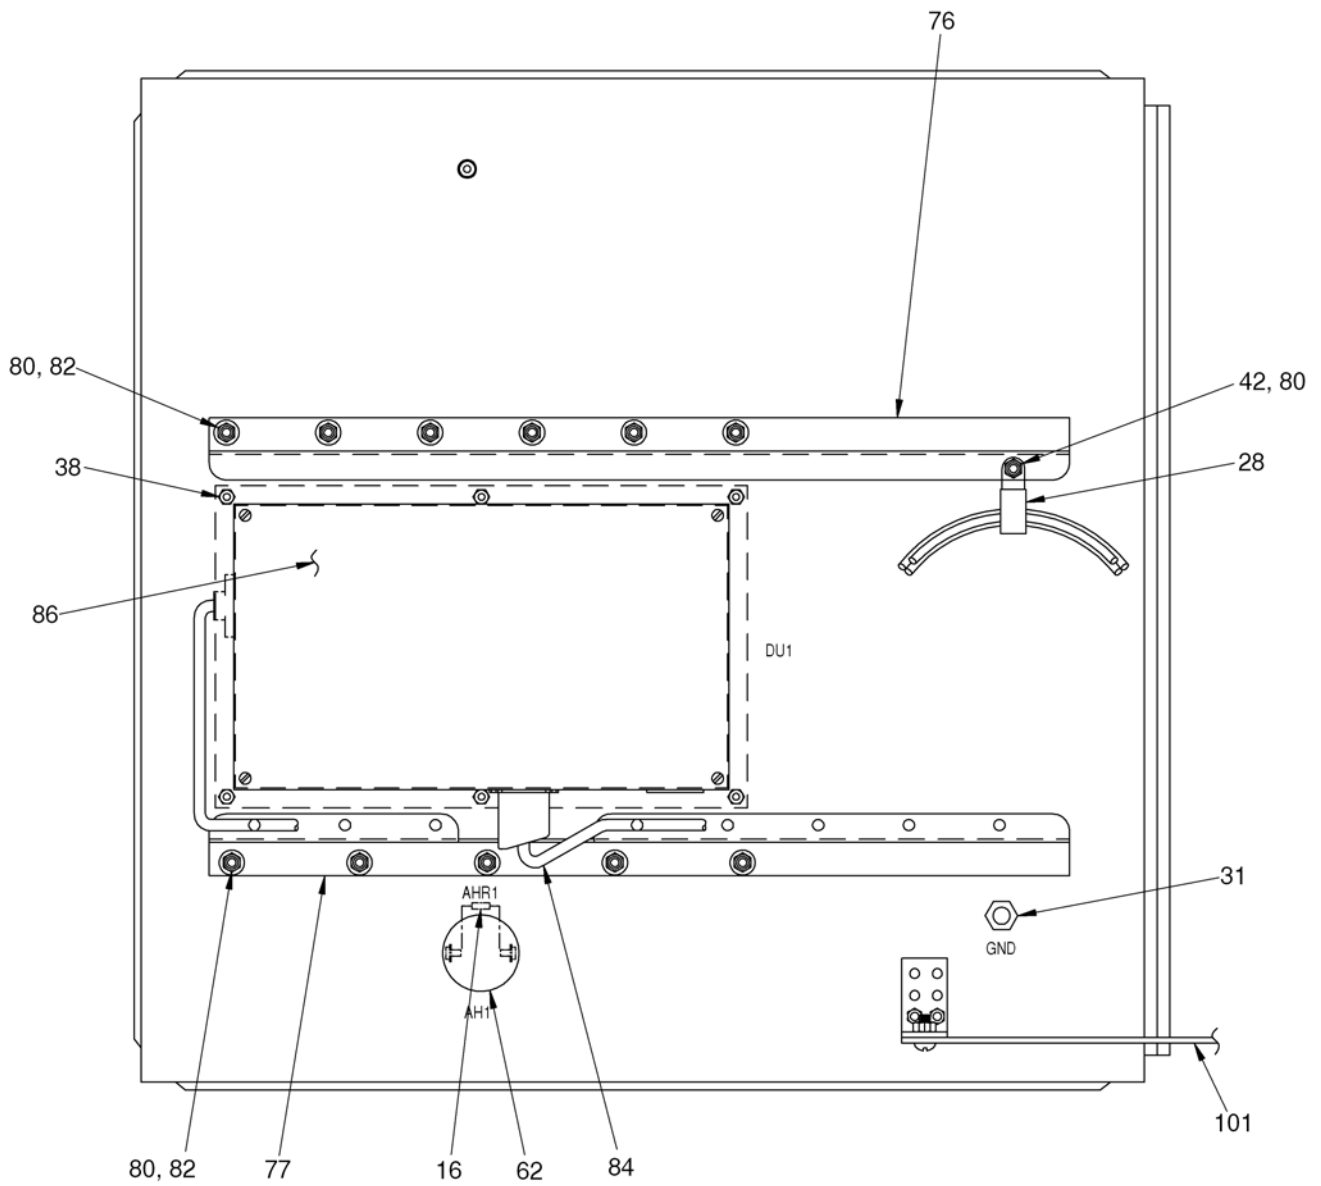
CMU Rear Electrical Enclosure Assembly (sheet 3 of 3)
